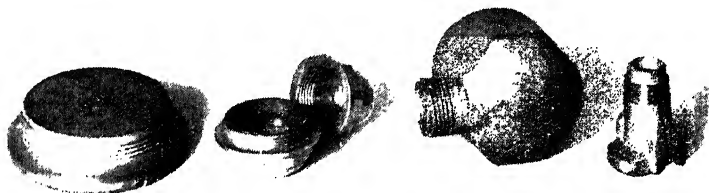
Zinc-base alloy pressure die-castings, illustrating four methods of producing threads
